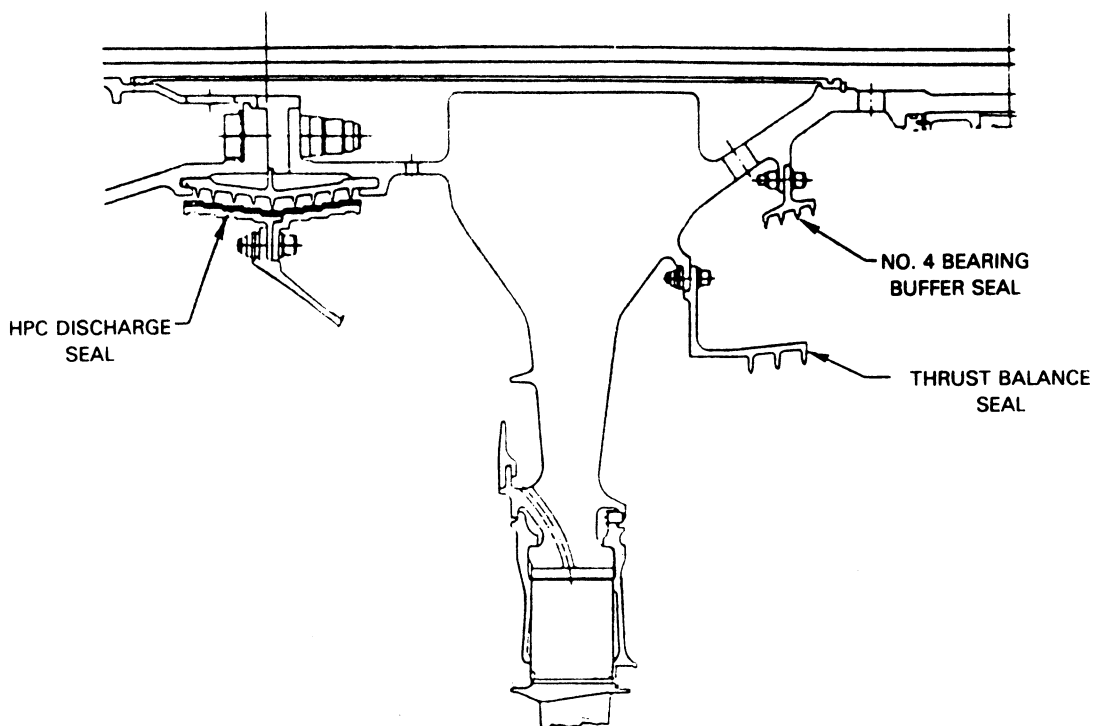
Seal Arrangement for High-Pressure Rotor Thrust Balance
